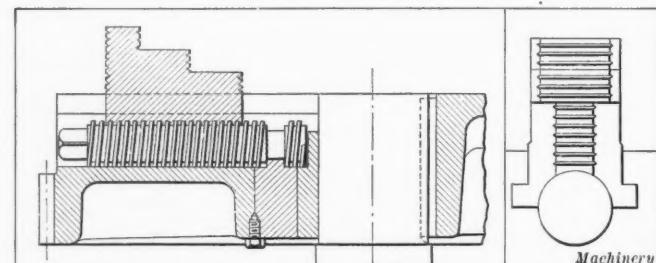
Heavy Independent-jaw Chuck with Spur Gear Drive
